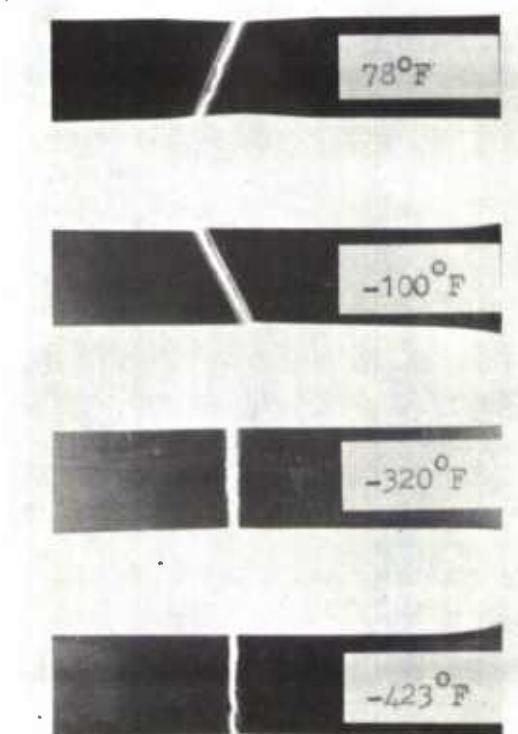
Photomacrographs of Fractured Tensile Specimens (301 and 304 Stainless Steels)
